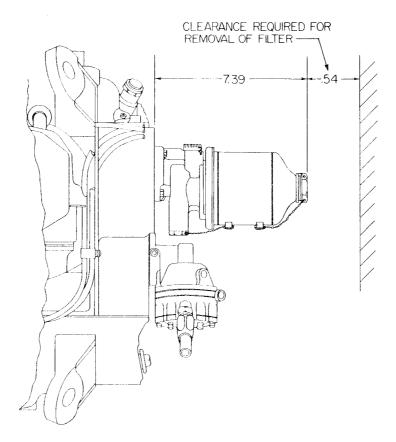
Full-Flow Oil Filter Installed at Rear of Engine, Side View
